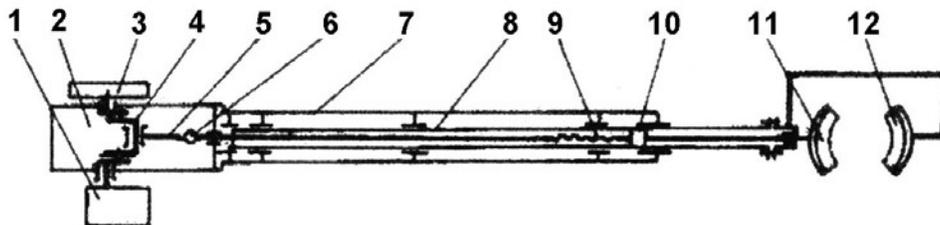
Scheme of a shaker with a rod connecting-crank mechanism
